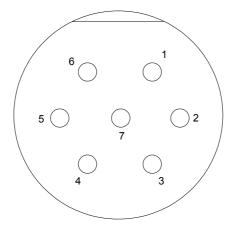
Inside view of power connector used on the Interrogator Unit cable
